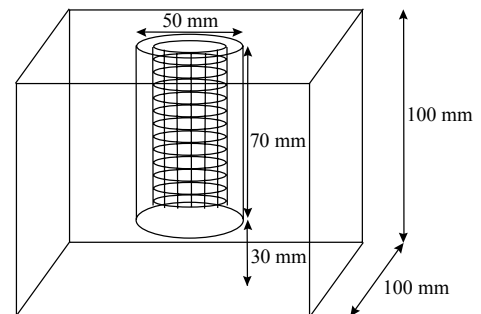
Geometry and dimensions of the cylindrical cavity casting mould used to produce the gauze-insert castings.
